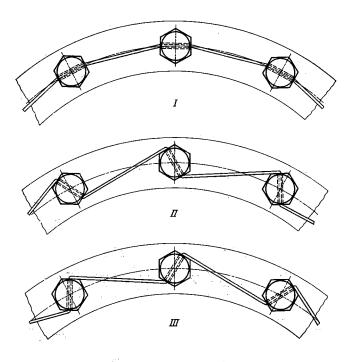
Wiring of bolts on cylindrical flanges *I*, *II*—incorrect; *III*—correct
